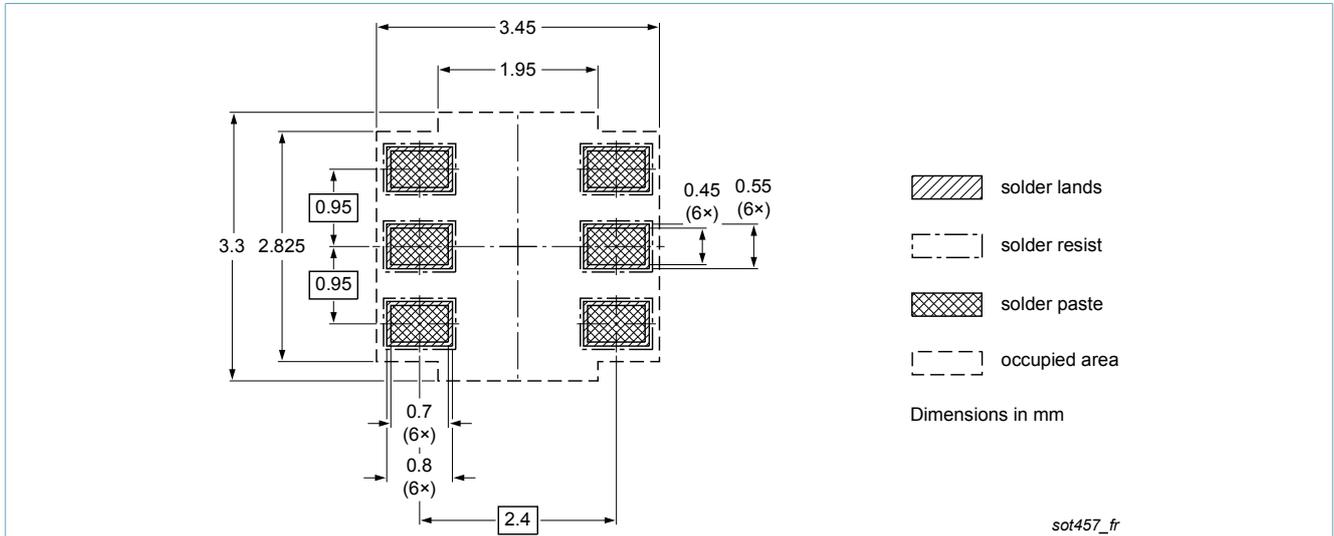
Reflow soldering footprint for TSOP6 (SOT457)
